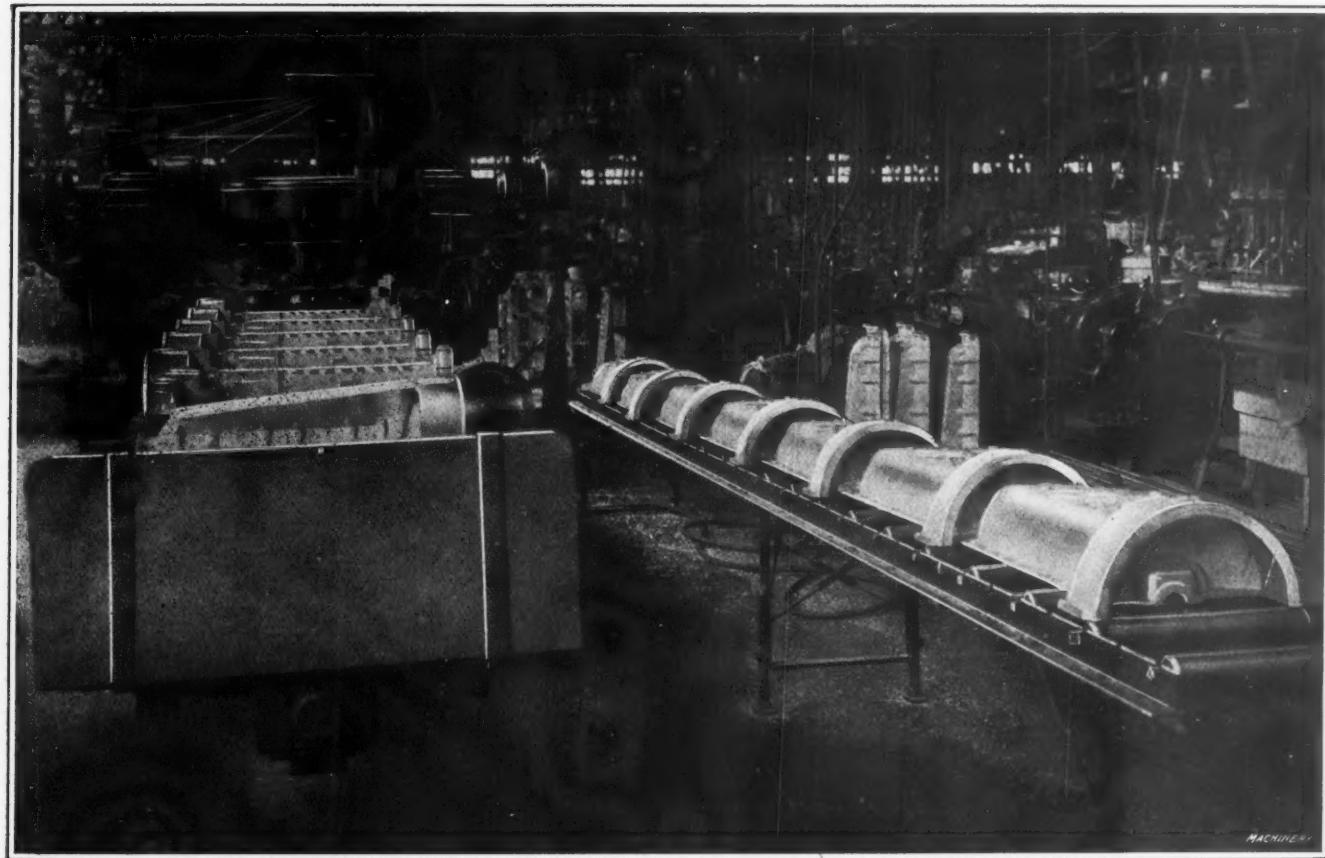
Arrangement of Roller-gravity Conveyors used to transfer Work from Machine to Machine
